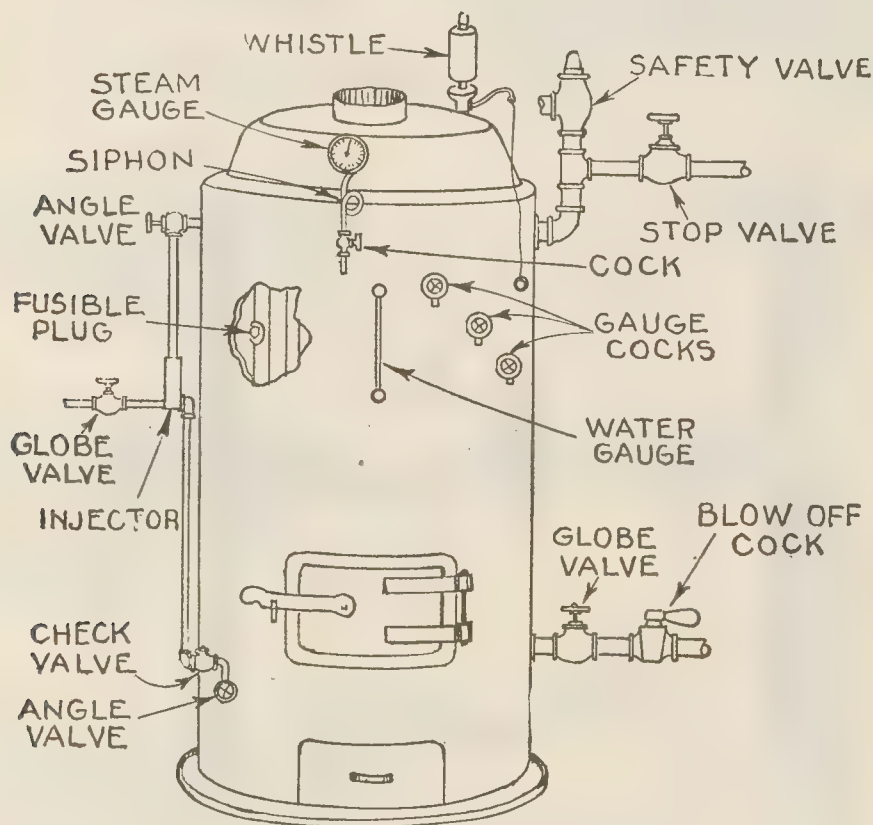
,120.—Vertical boiler showing the boiler fixtures consisting of control and indicating devices essential for safe operation. A portion of the shell is cut away to expose the fusible plug to view.
